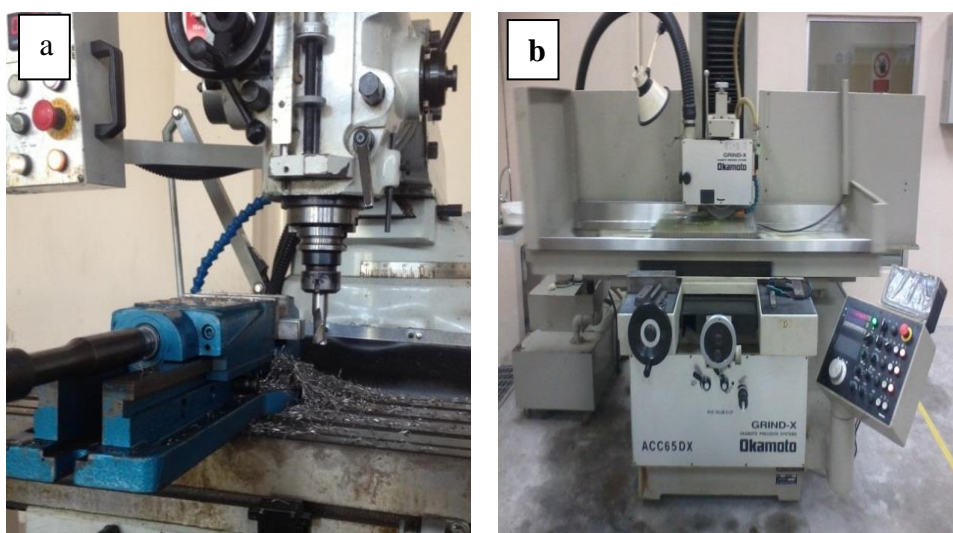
Machining process a) Milling Machine and b) Grinding Machine
